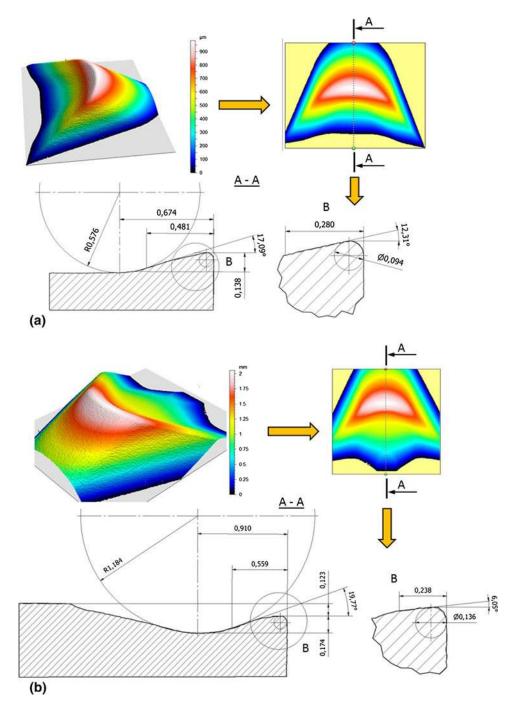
IFM image of cutting wedge together with the dimensioned cross-section of the tool in the corner zone. Image for wedge T1 (a) and wedge T2 (b)
